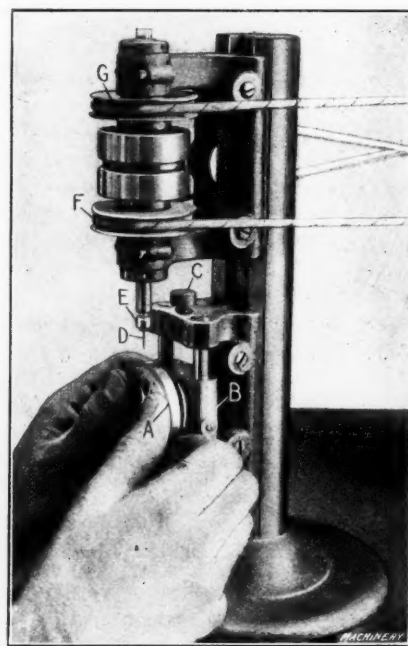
Friction Tapping Machine for Dial Foot Screw Holes
